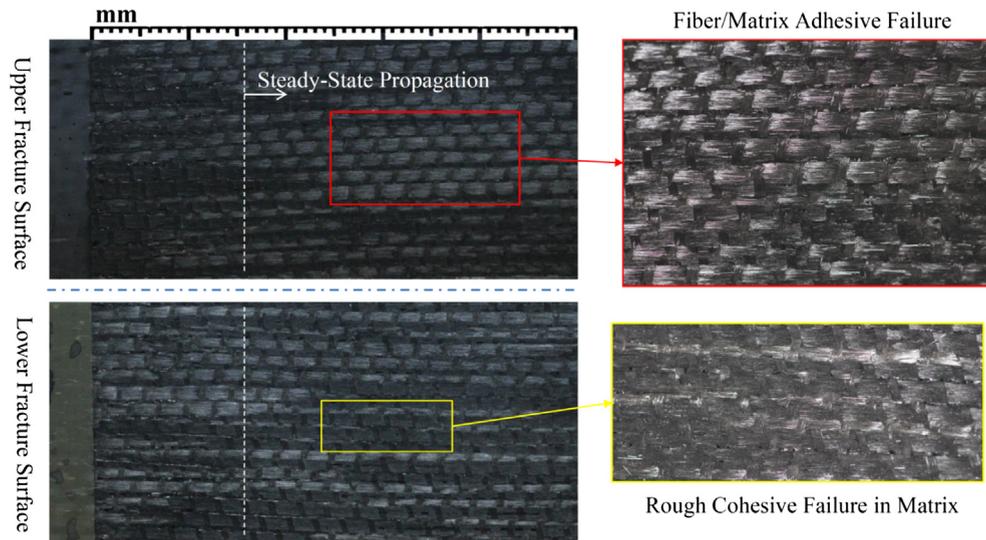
The fracture surface of a glass/CNF/epoxy composite specimen tested at a 200 mm/sec loading rate.
